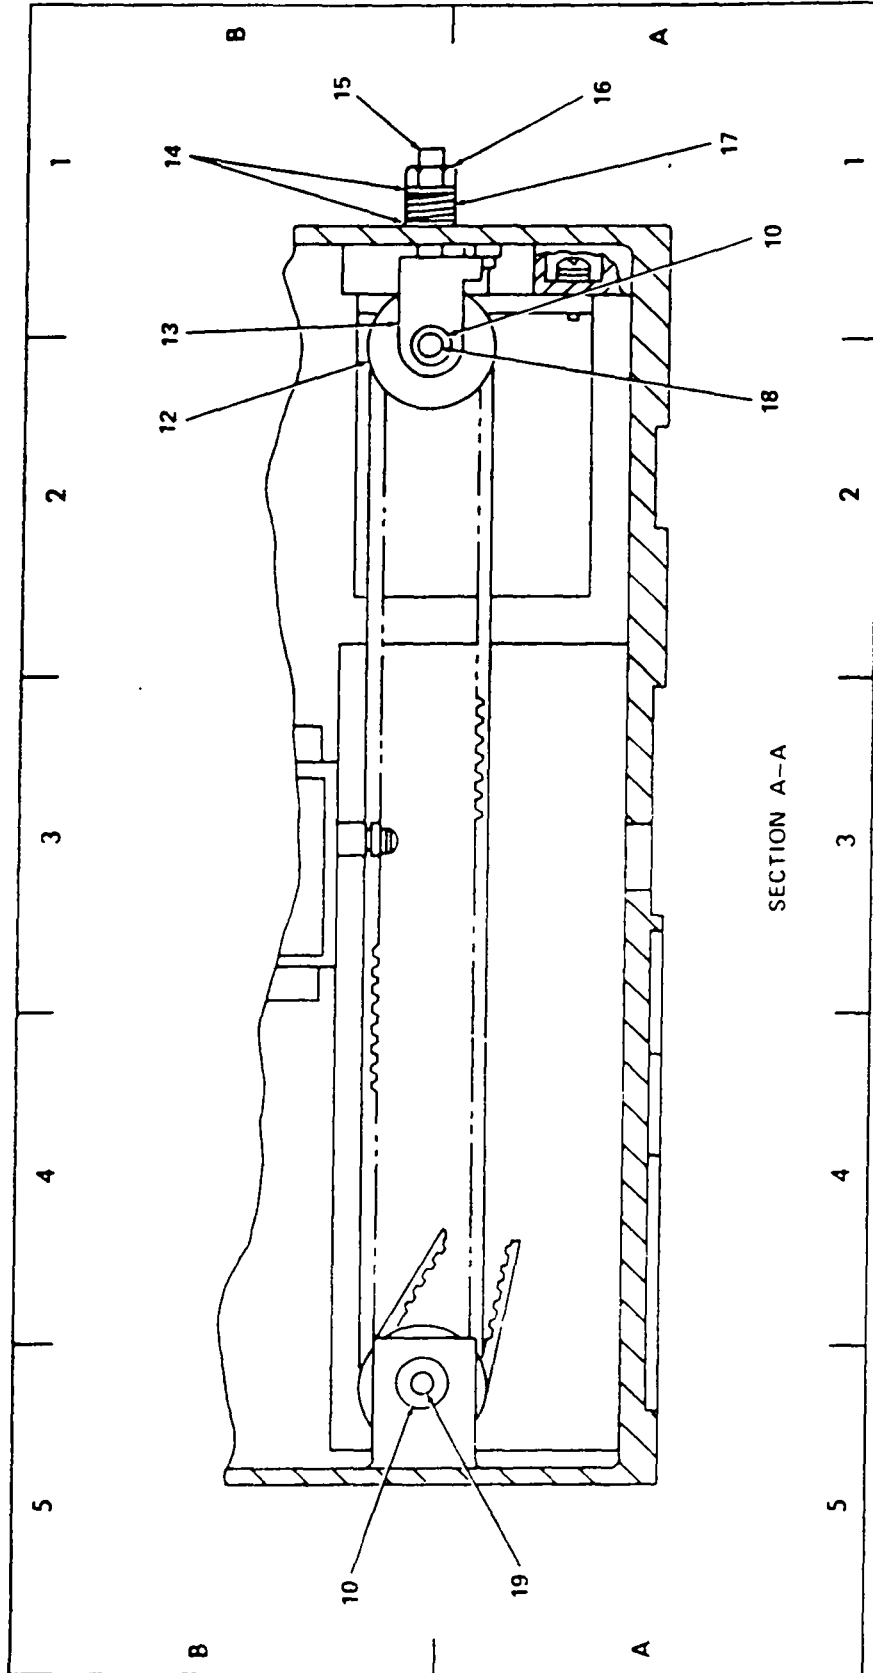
Teleprinter Subassembly (Sheet 3 of 5)
